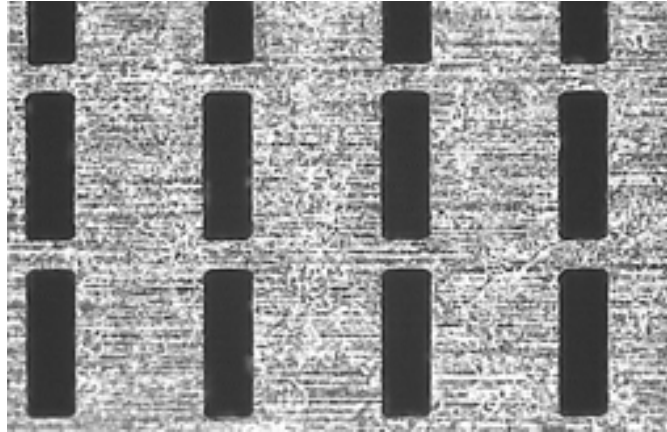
Rectangular openings, 100 x 300 μm wide, in 50- μm stainless steel; rate: 20'000/hour
